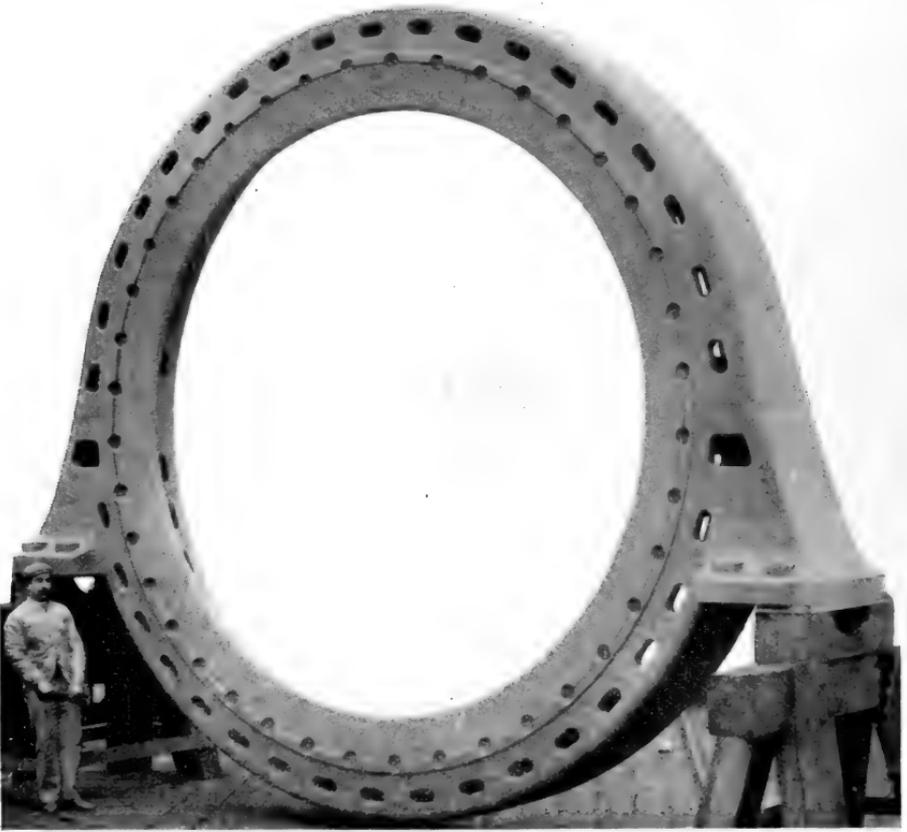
Casting for Frame of Stationary Armature. Dick, Kerr & Co.
